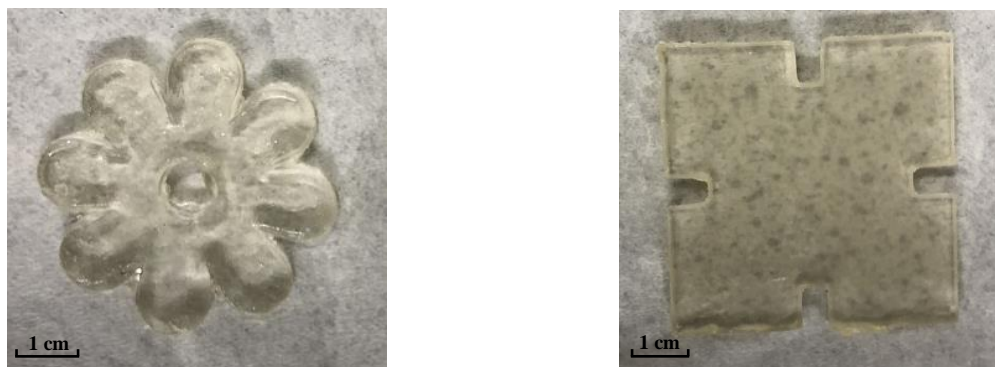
The appearance of printed samples (L) Flower & (R) Jigsaw.
